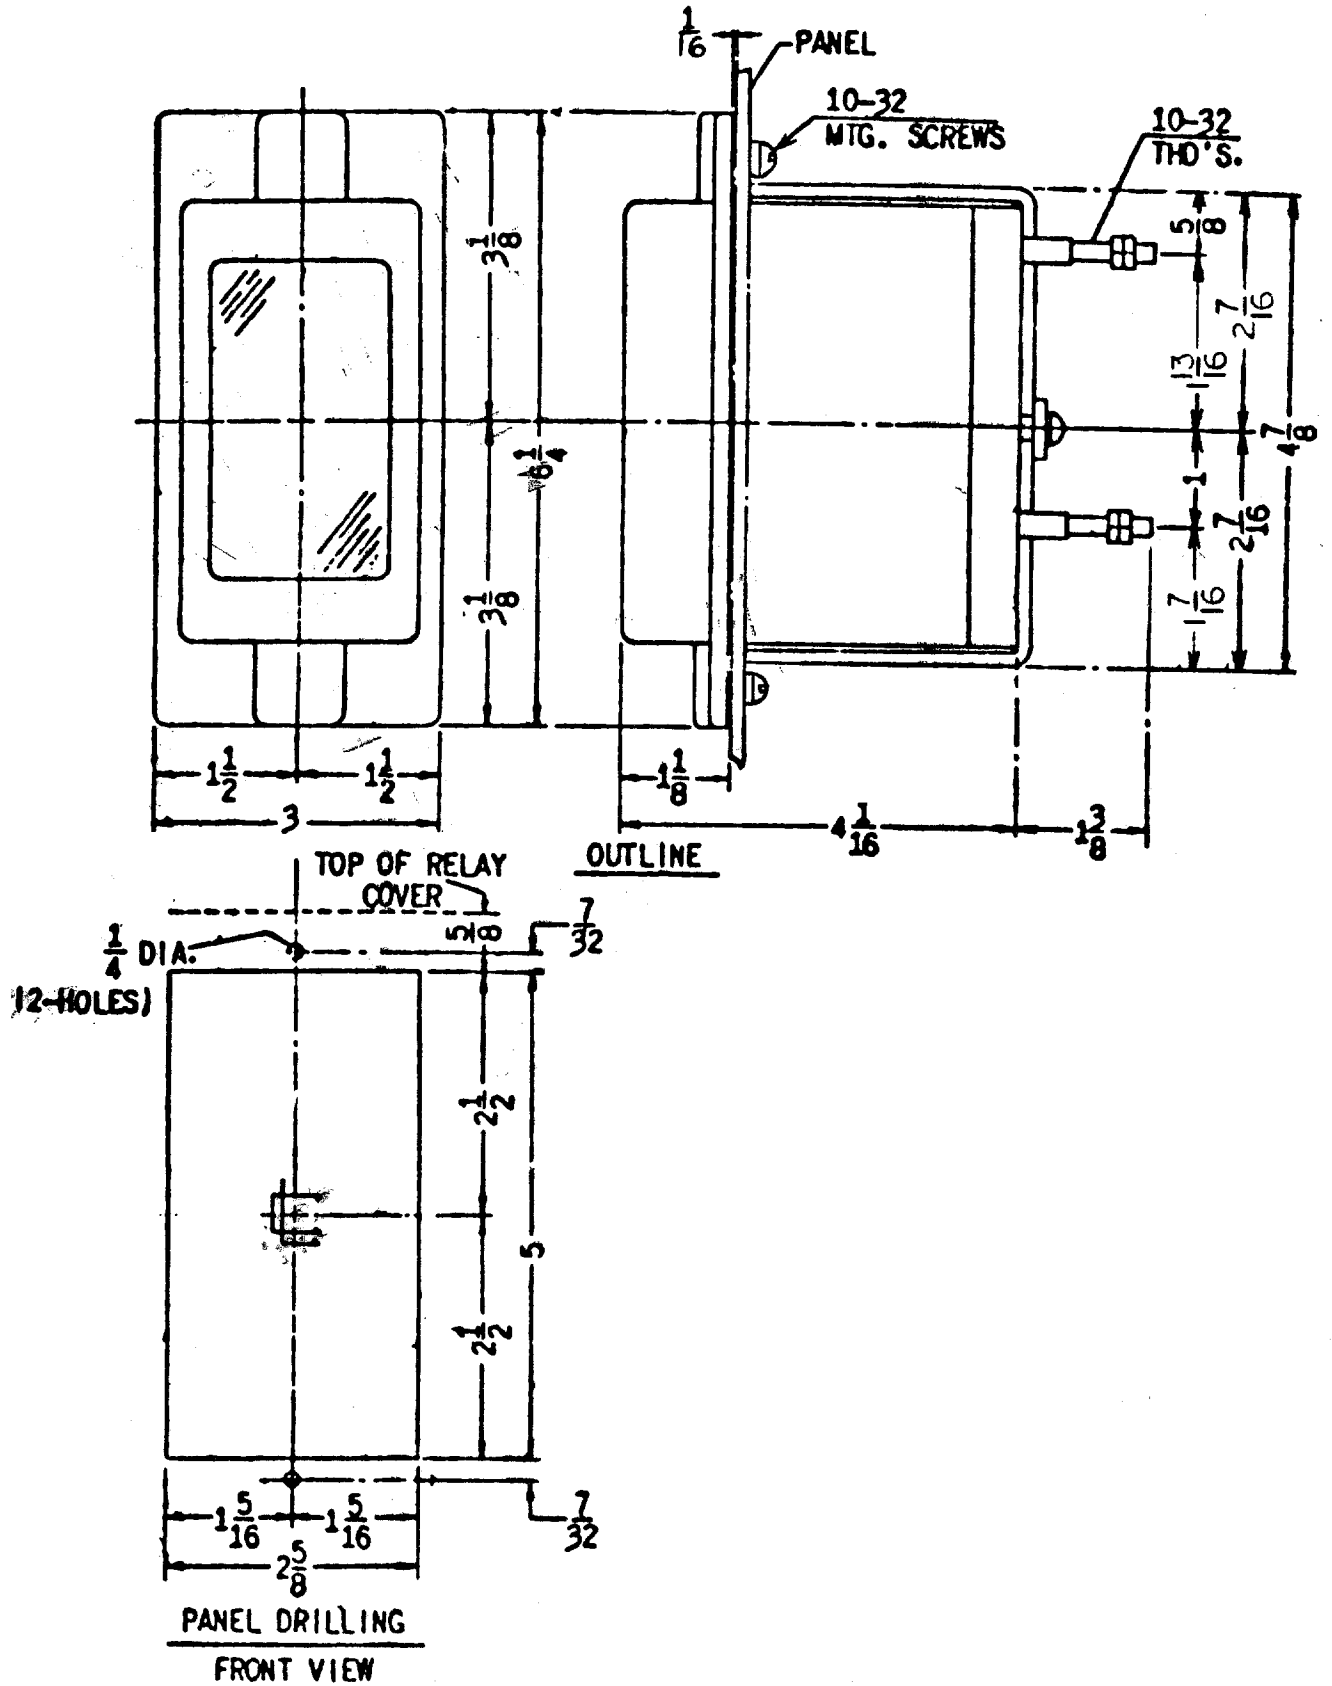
(0269A1799-0) OUTLINE AND PANEL DRILLING DIMENSIONS FOR THE SEMI-FLUSH MOUNTED NGA99AB(-) RELAY.
